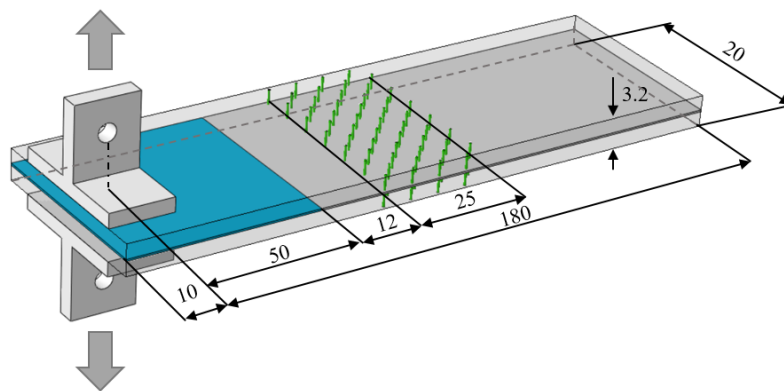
Geometry and dimension of z-pinned DCB specimen
